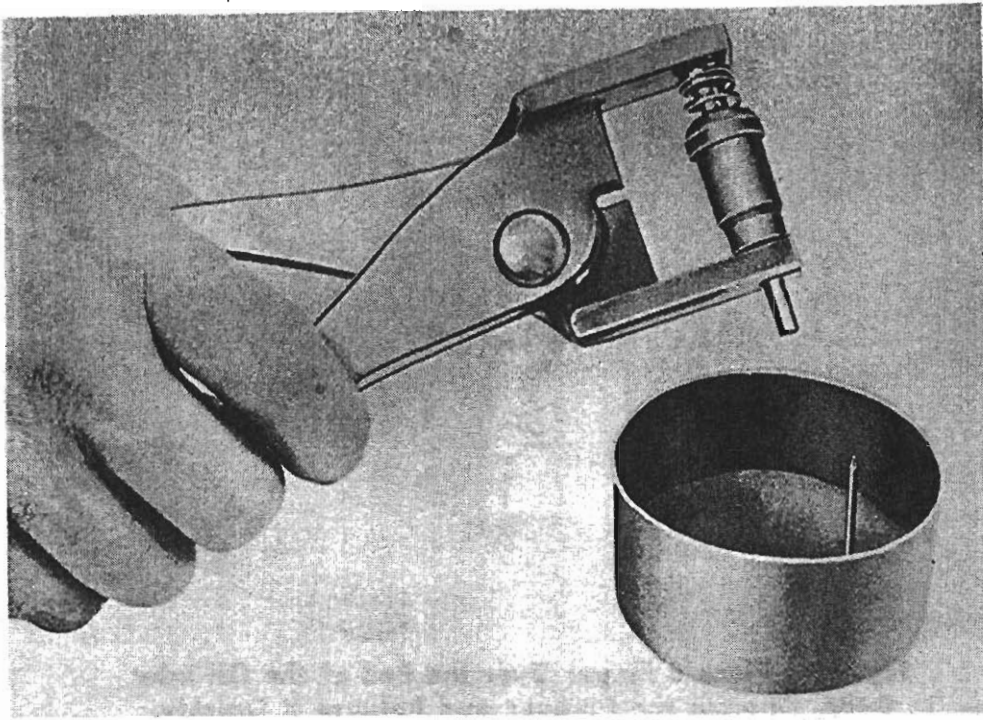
Depress the Plunger and Check for Leakage After the Cylinder Has Been Filled.
